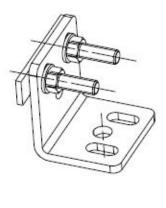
Accessories - order separately, installation bracket, mounting bracket - metal, SLX4-MO-LB All dimensions are specified in mm.
